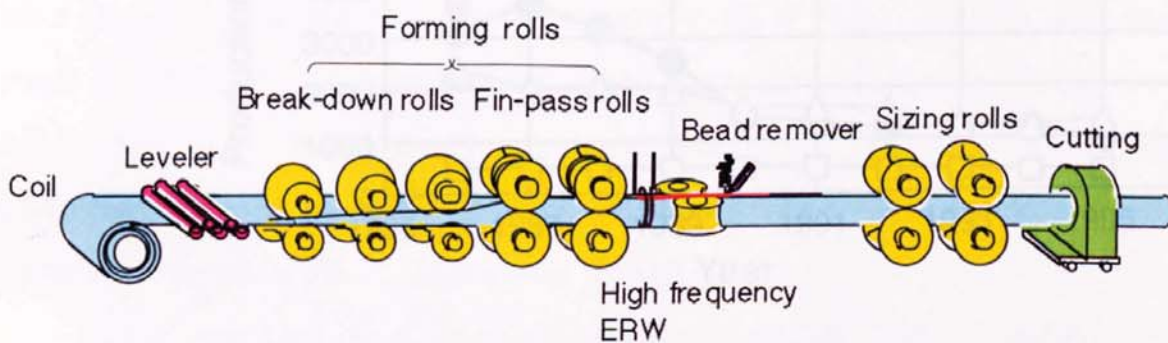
Typical layout of tube-making process using cold roll-forming and high frequency electric resistance welding
